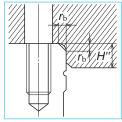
Shoulder for the rail datum surface slide datum surface
